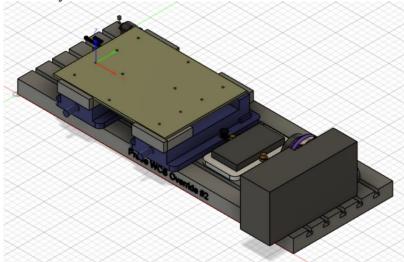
Sacrificial Plate Mounted on VF-4 Vice, Fusion Manufacturing
